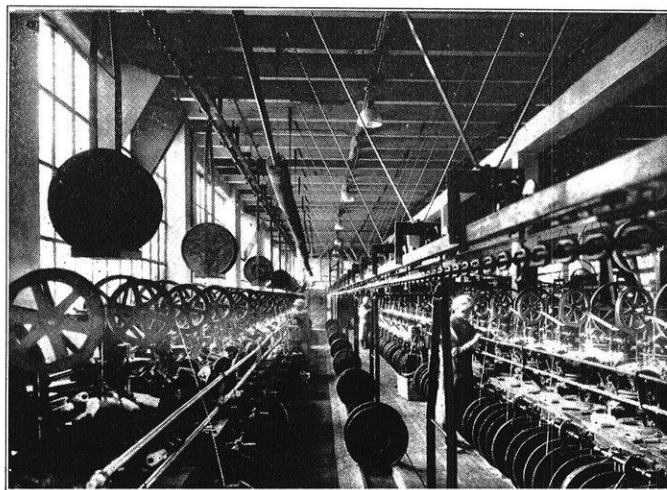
Rubber covered wire plant in Holland showing conveyor system.
